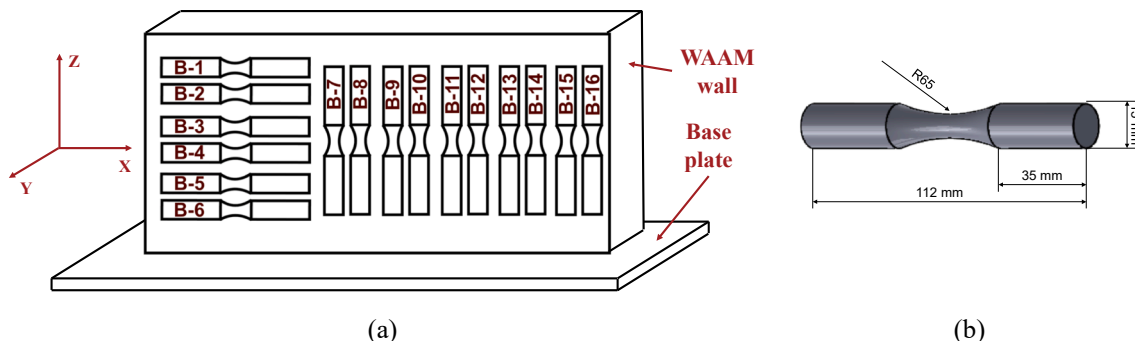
(a) Schematic extraction plan for a WAAM wall, and (b) cylindrical specimen dimensions.
